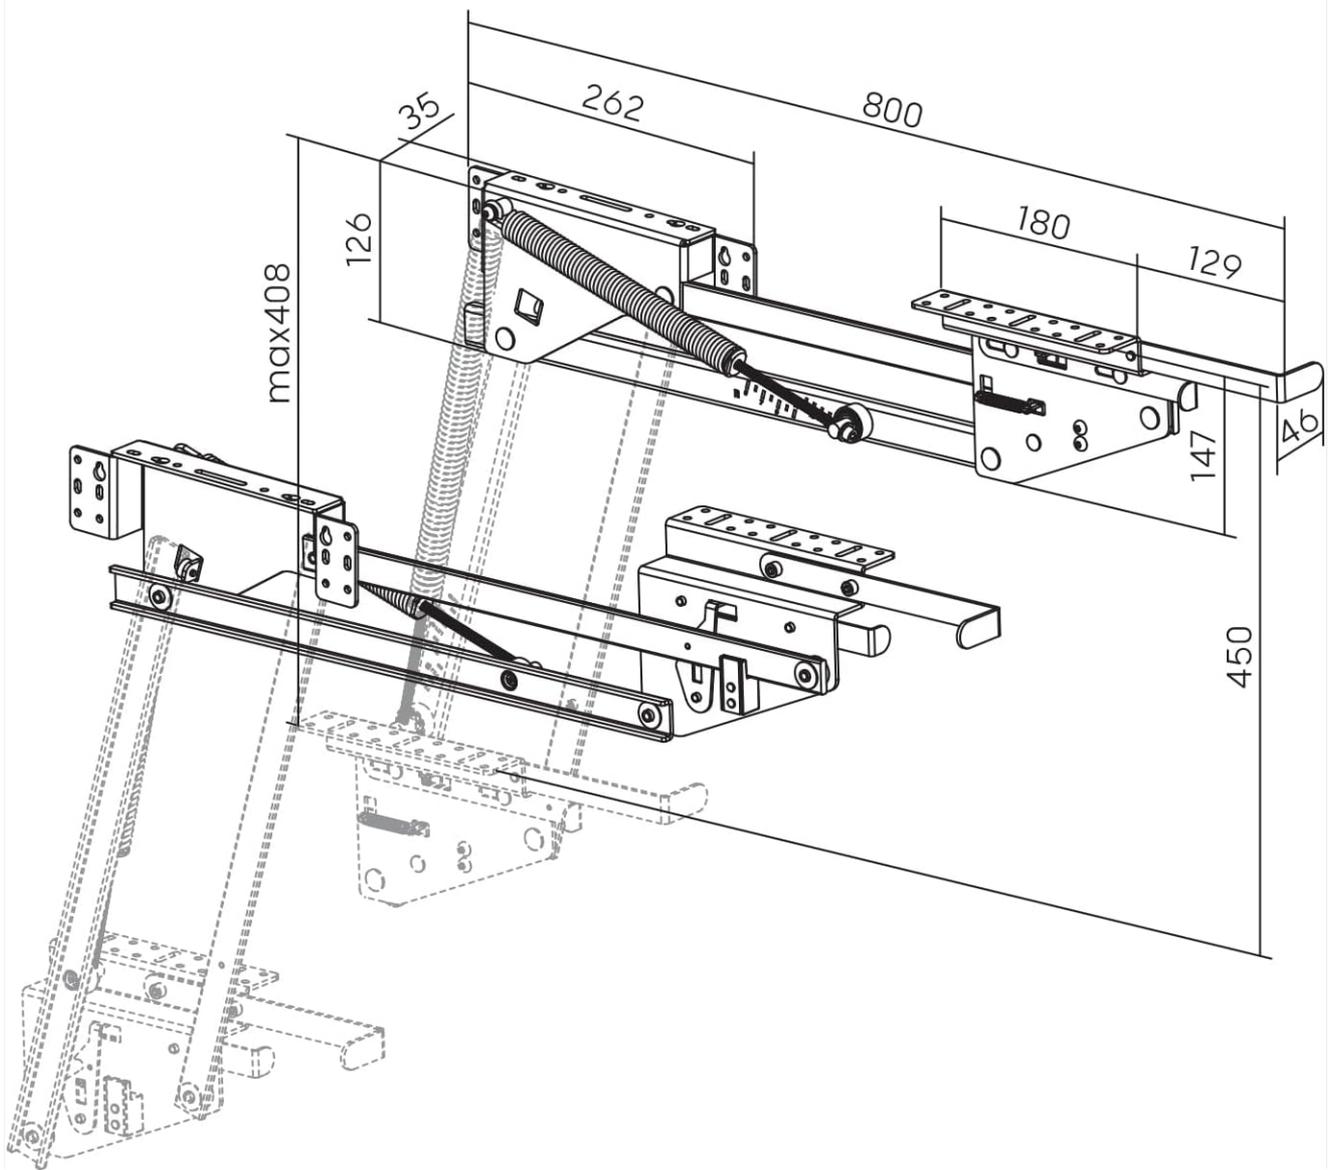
Technical drawing showing detailed dimensions of the MC-497 lift in millimeters.
